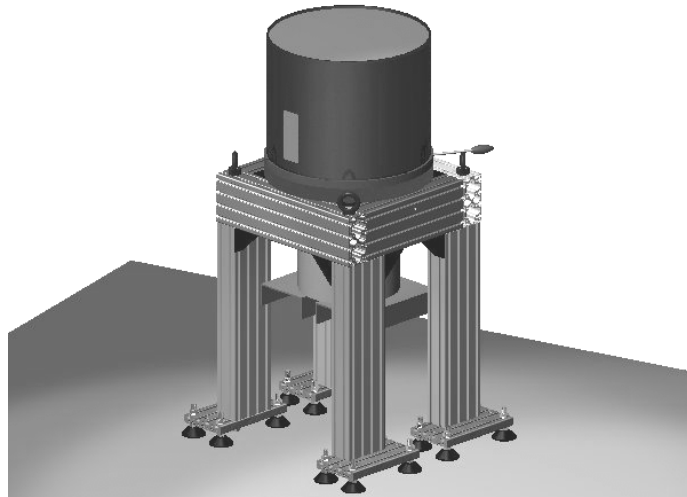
Technical drawing: Total view of the SbBe source with flange-mounted storage and transport container.
